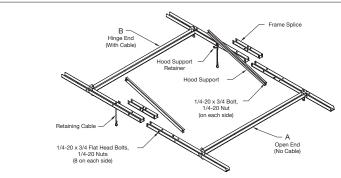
3FKE2 & 3FKE3 Hood Frame Assembly
